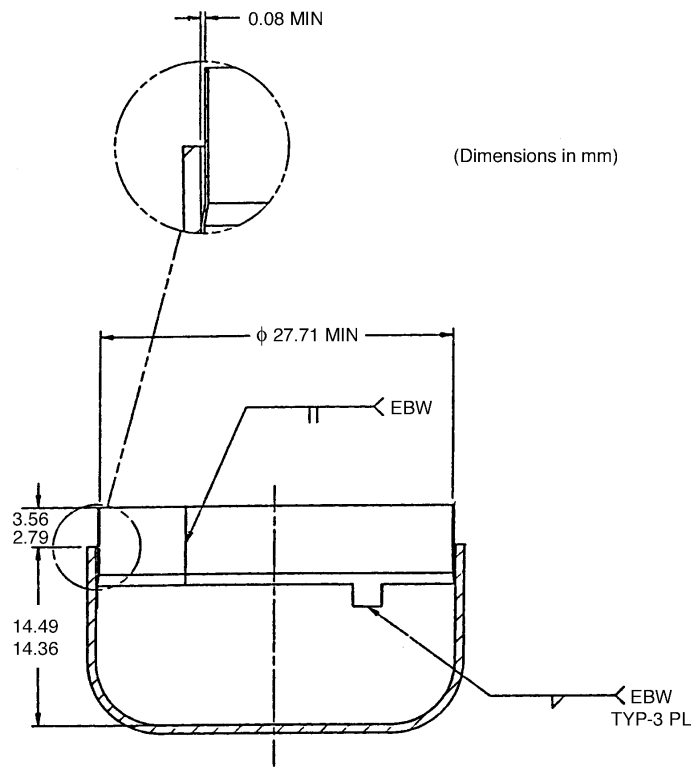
Galileo/Ulysses weld shield and shield cup.
